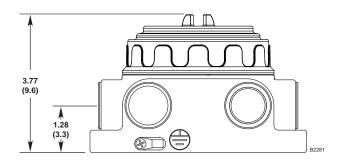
Junction Box Dimensions in Inches (Centimeters)
